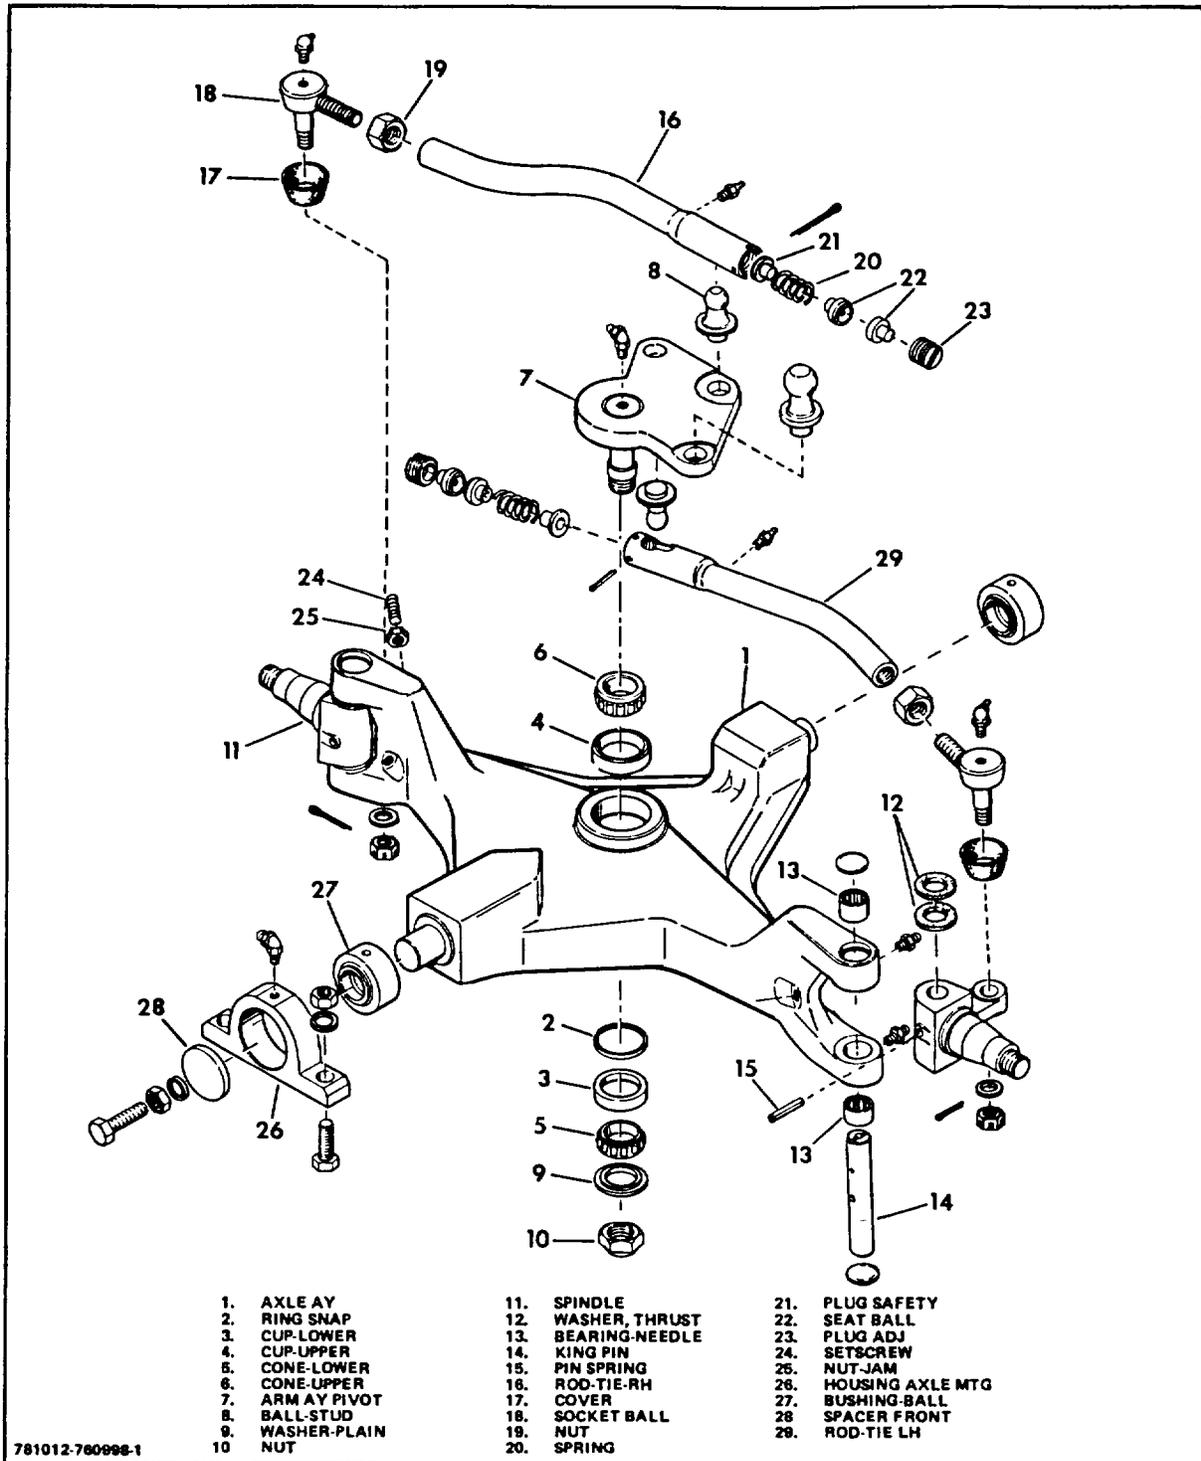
Steer Axle Assembly (ACC 100-120)
